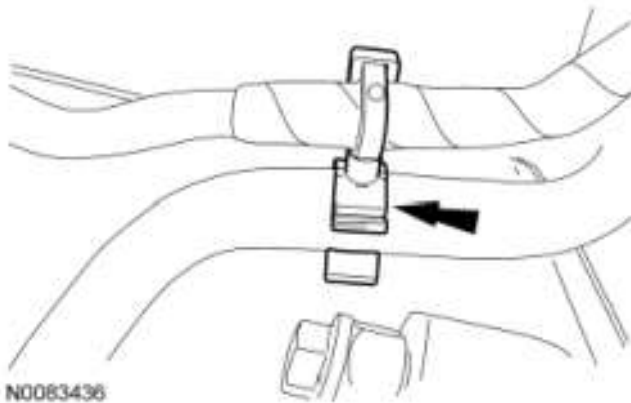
Locating CHT Sensor Jumper Wire Retainer
